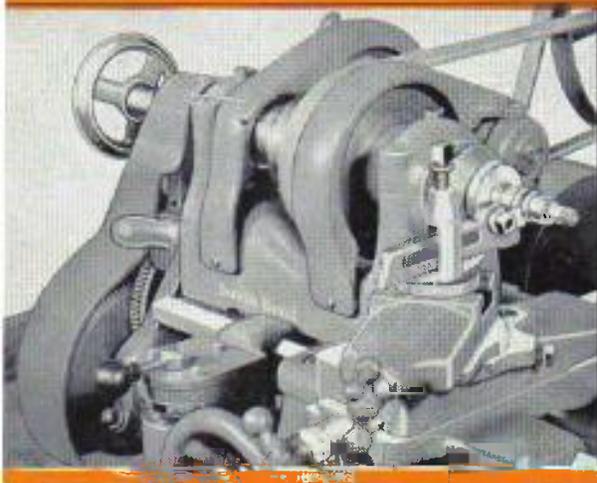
Machining Small Parts Held in Hand Wheel Draw-in Collet Chuck Attachment.
